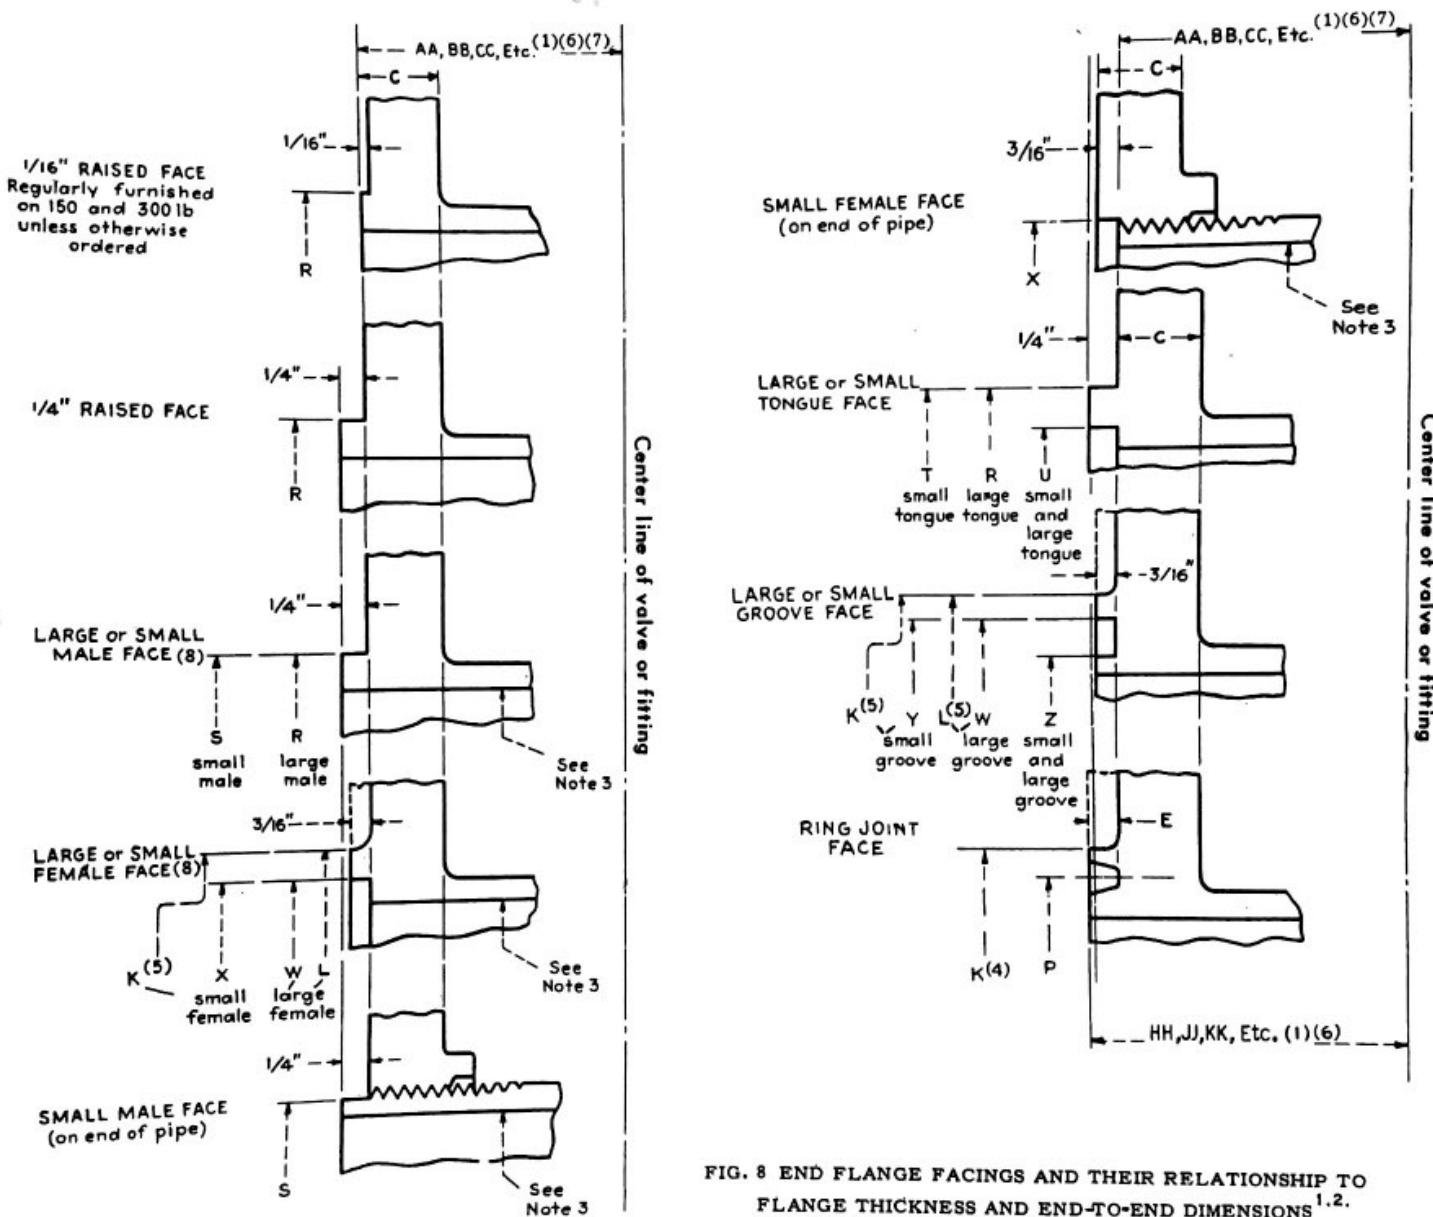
END FLANGE FACINGS AND THEIR RELATIONSHIP TO FLANGE THICKNESS AND END-TO-END DIMENSIONS^{1,2}.
